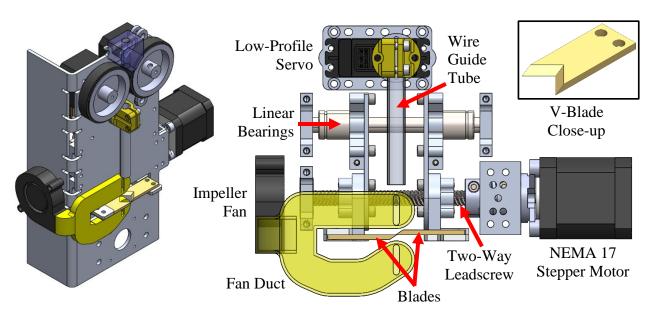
Left*: complete view of cut/strip unit without extruder assembly. *Right*: view of cutter and wire guide subsystems with rigid face plate removed.
